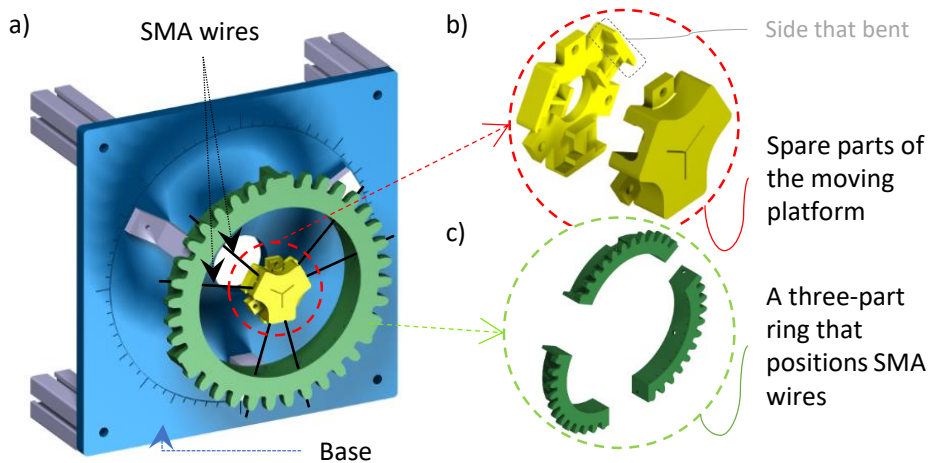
Main components of the second version of the system. (a) Assembly of the mechanism. (b) Exploded view of the moving platform. (c) Exploded view of the ring.
